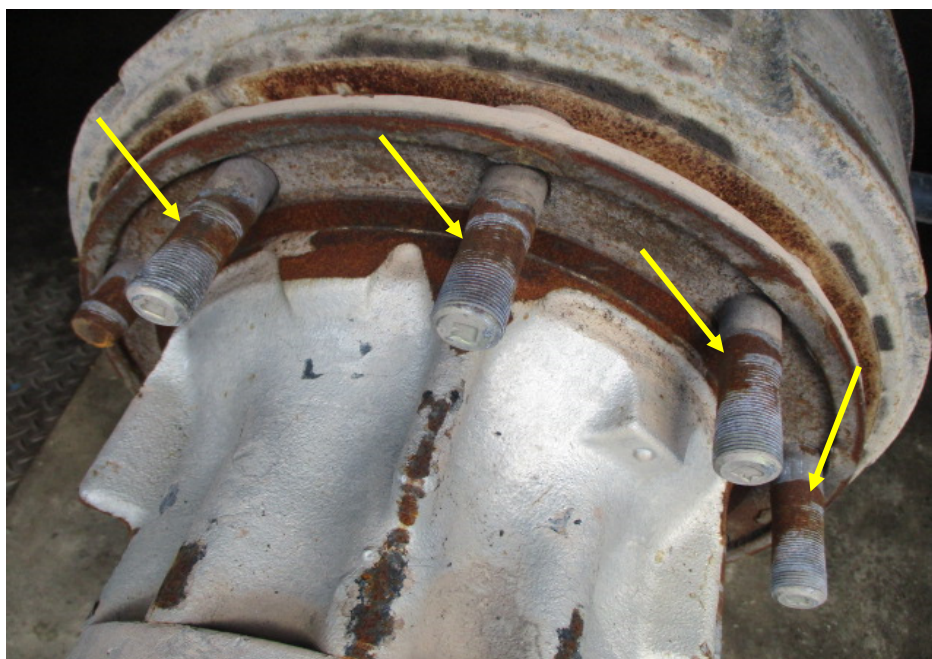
shows a general view of the other remaining unbroken wheel bolts. Similar to the broken wheel bolt, rust (arrowed) was also seen on the tread area of the remaining 9 unbroken wheel bolts. The rust seen on all 10 wheel bolts could have developed due to the bolts being exposed to natural environmental condition during the 3 months plus period when the Insured Vehicle was impounded by Traffic Police. However, upon review of the incident scene photographs, the broken surface area of the broken wheel bolt appears to be already rusted before the Insured Vehicle was impounded (refer to photograph 11 below).
